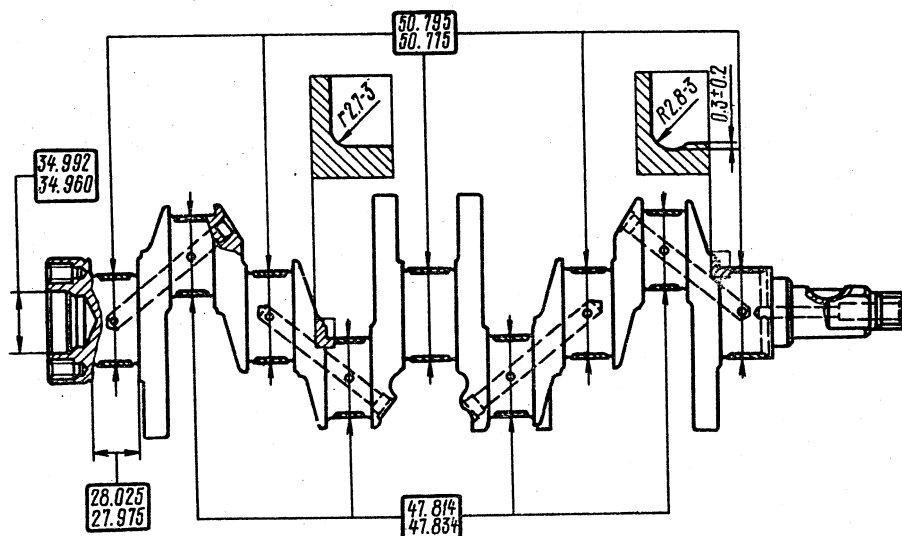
Main Dimensions of Crankshaft Journals and Fillets
